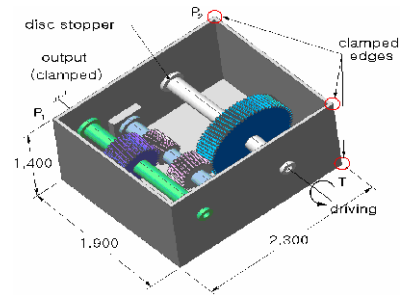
A simple gear transmission system composed three gear shafts (unit: mm).
